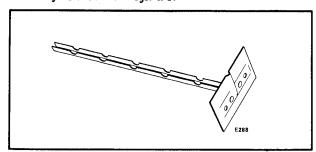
PLENUM BULB HOLDER ACCESSORY.
